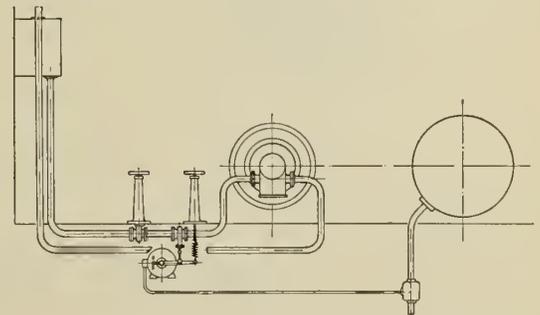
Scoop Tube Type—Pump Drive, Pressure Valve Control.
